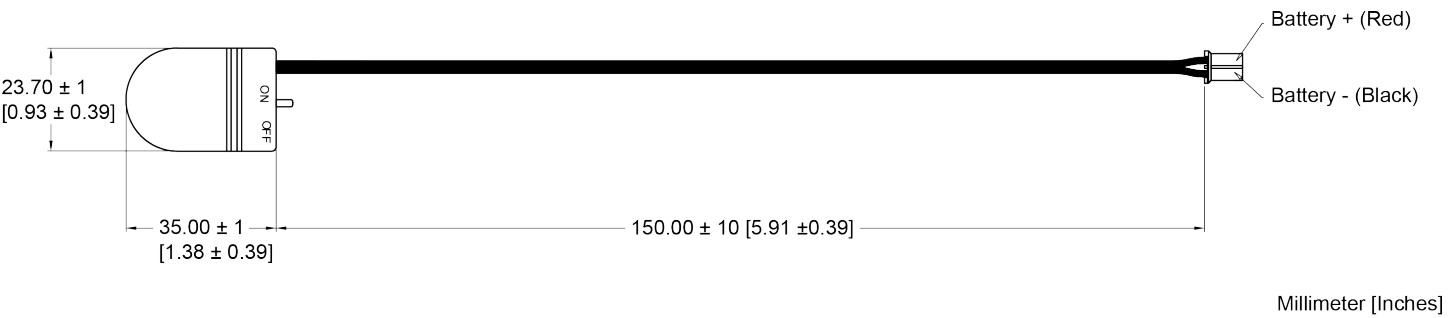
Dimensions of the Distech Controls RTC battery adapter (sold separately)
